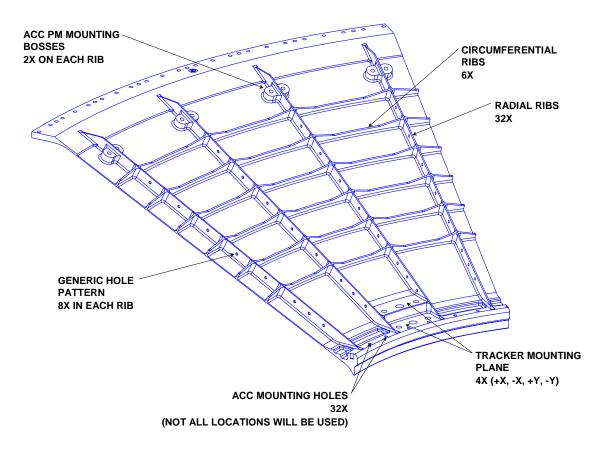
ISO View Showing Experiment Interfaces on Conical Flange
